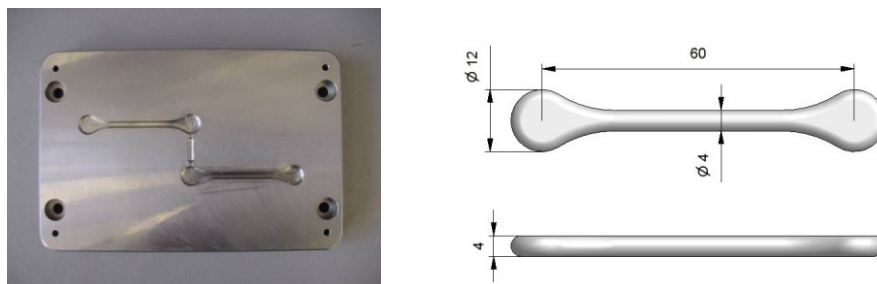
Mould half for tensile test specimen and dimensions of the mould cavity in mm
